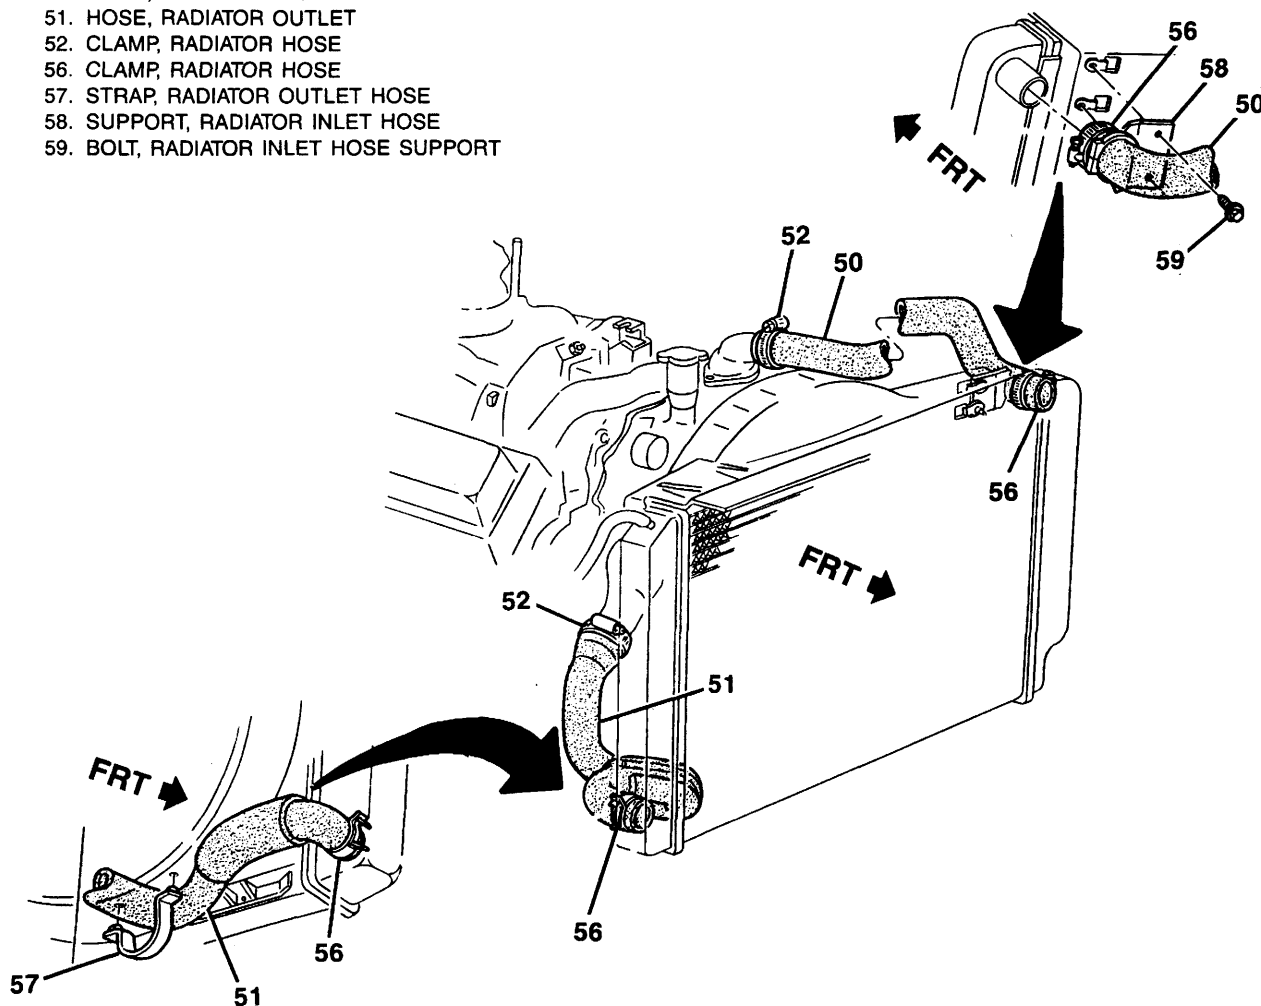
Radiator and Hoses (5.0L, 5.7L, and 7.4L Engines)
